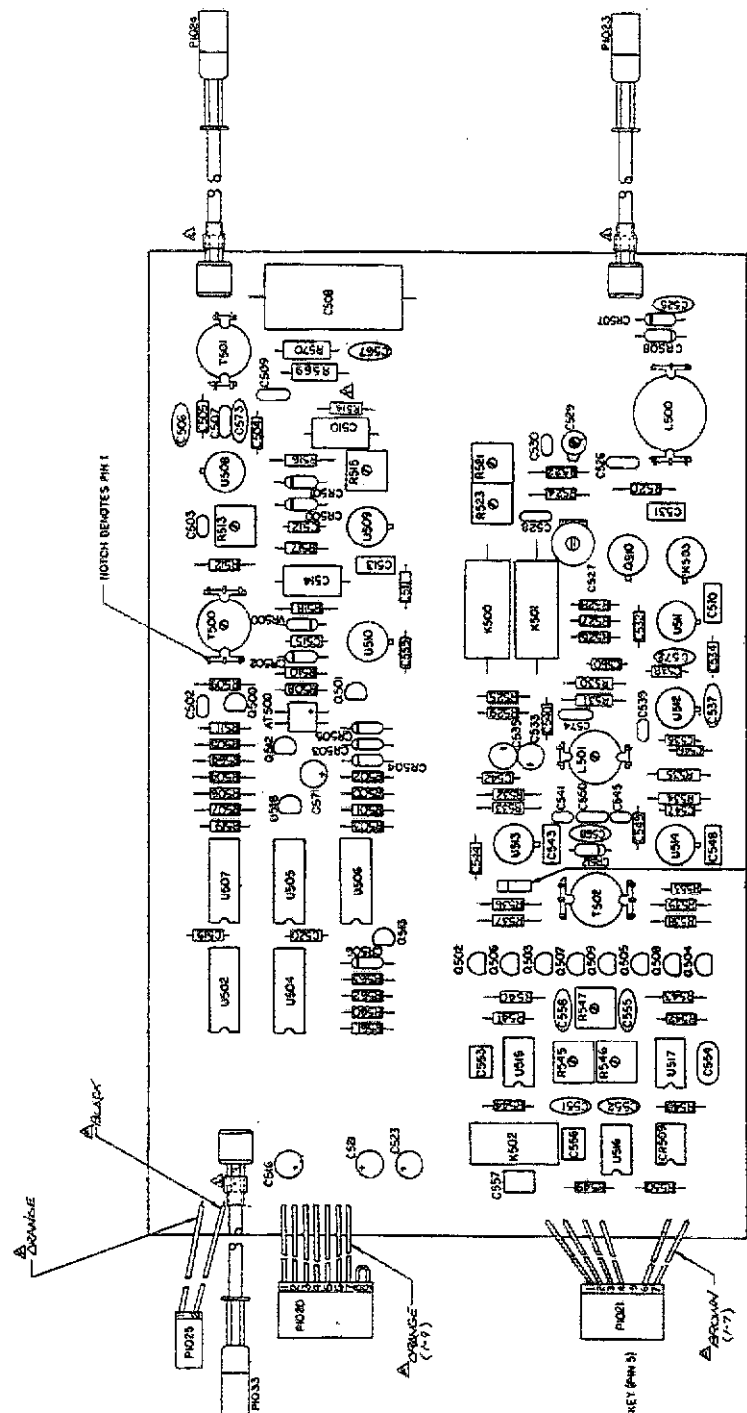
Model 5901 (100kHz), Component Location Drawing, Dwg. No. 5901-100
